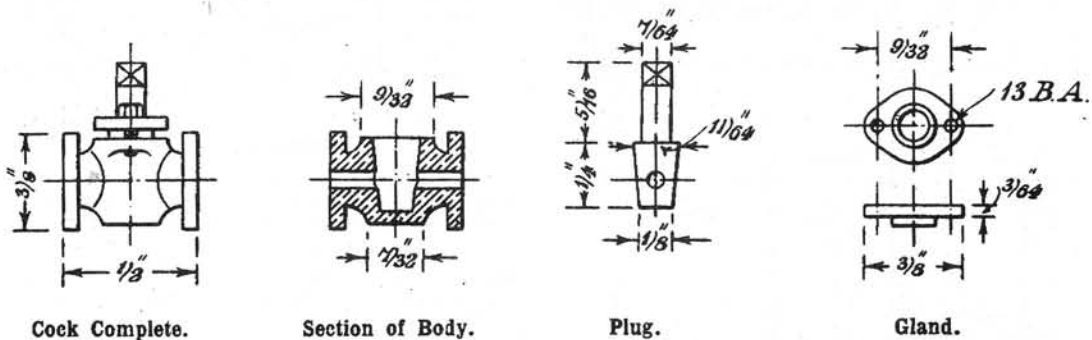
A 1-16th in. Straightway Gland Cock.
